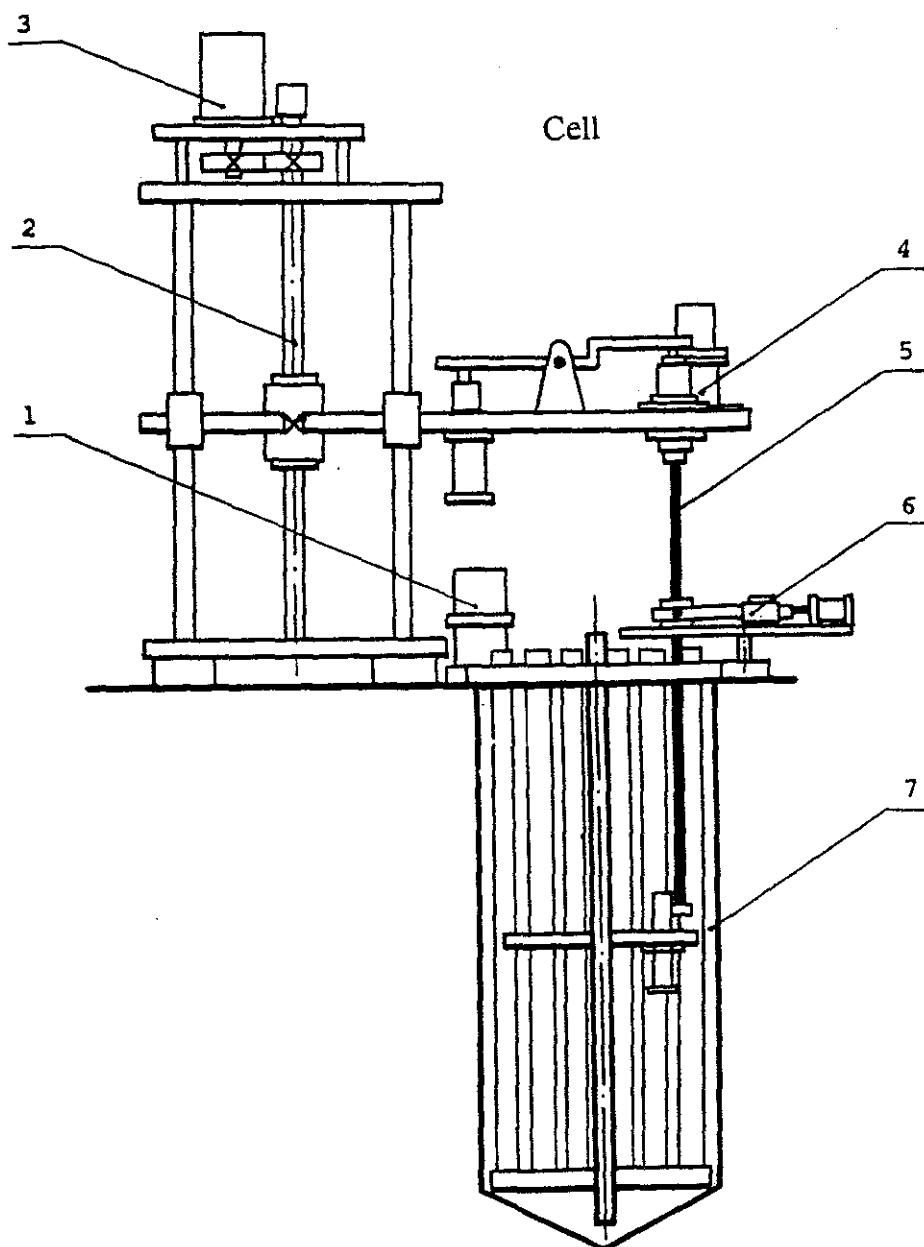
Automatic facilities to measure the FEs outer diameter and eddy-current defectoscopy: 1 - drum rotating motor; 2 - driving screw; 3 - FE movement motor; 4 - FE rotating motor; 5 - fuel rod under test; 6 - transducer unit; 7 - FE store drum
